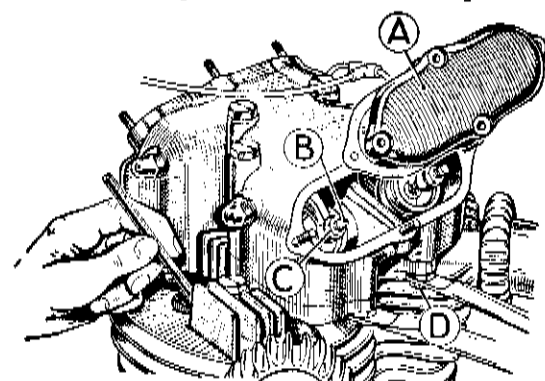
Valve Clearance Adjustment and Ignition Setting.
